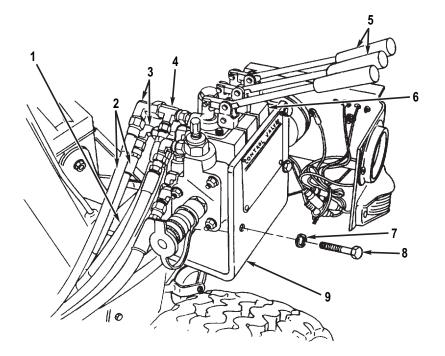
Hydraulic Control Valve (Rear Dolly) Removal.
